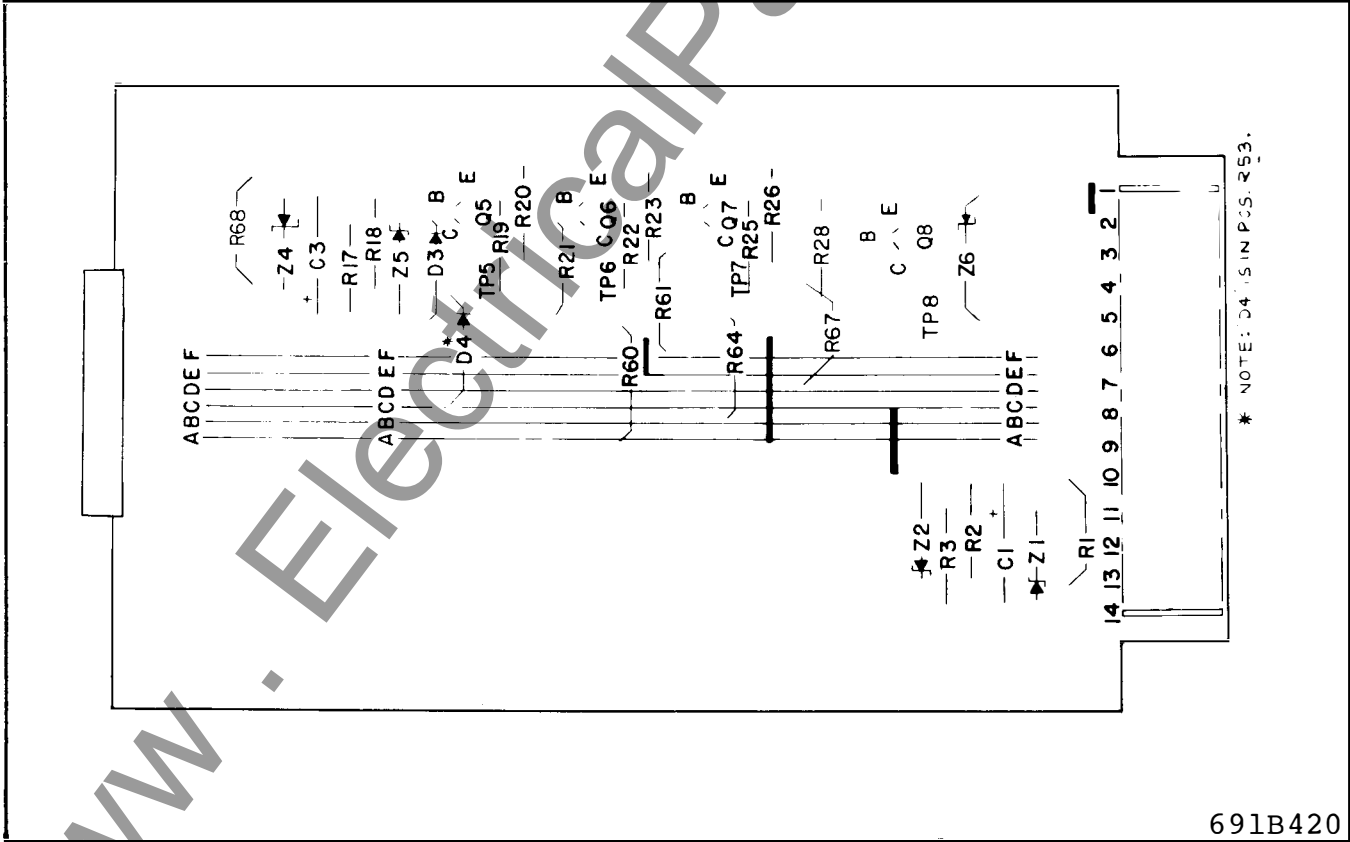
Breaker Failure Logic and Relay Driver Module Component Location Drawing.
